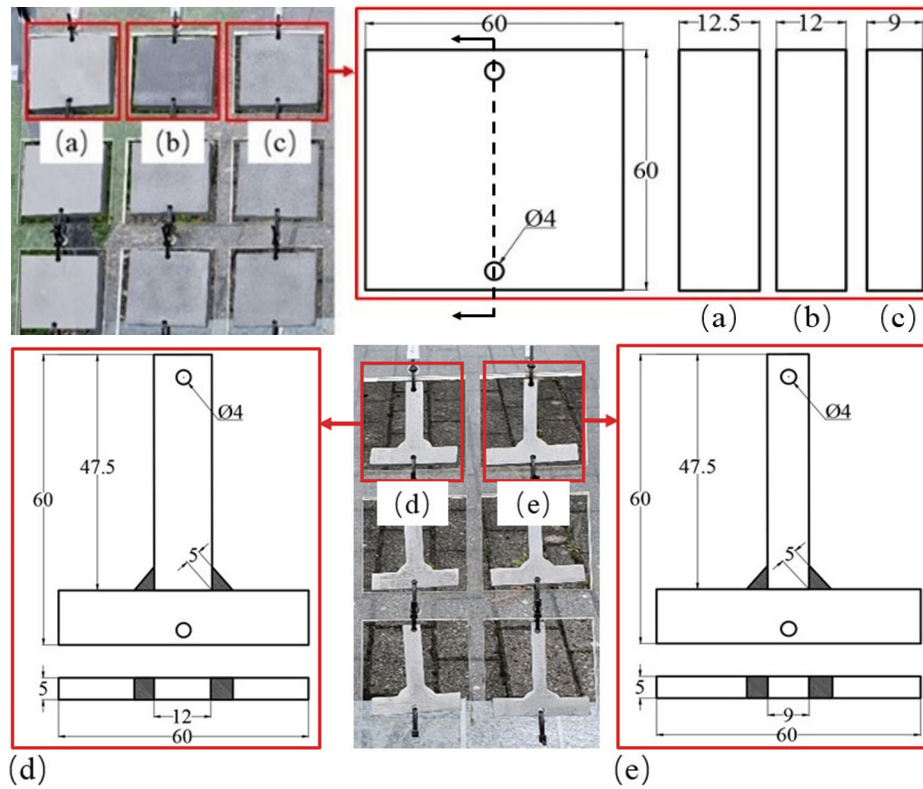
Scheme of welded specimens: (a) Geometry of EN1.4062; (b) Geometry of S355J2; (c) Geometry of P460NL2; (d) Geometry of T-joint: EN1.4062/S355J2/309LSi (electrode); (e) Geometry of T-joint: EN1.4062/P460NL2/309LSi (electrode).
